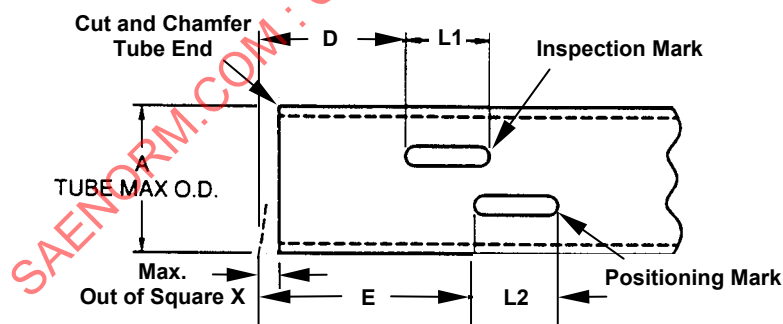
TUBE MARKING USING INK STAMP OR ELECTRO-ETCH
